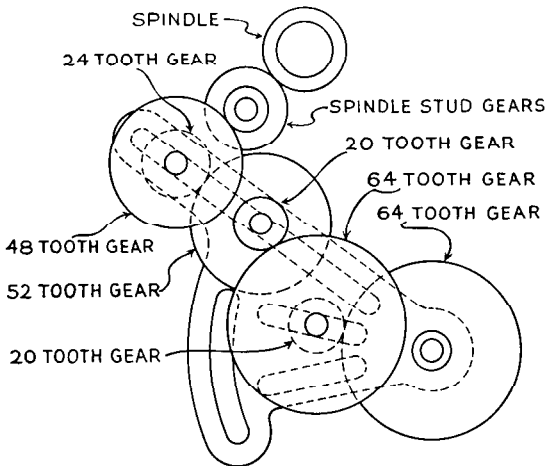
Gear set-up for .001877 inch carriage feed (see page 34).
